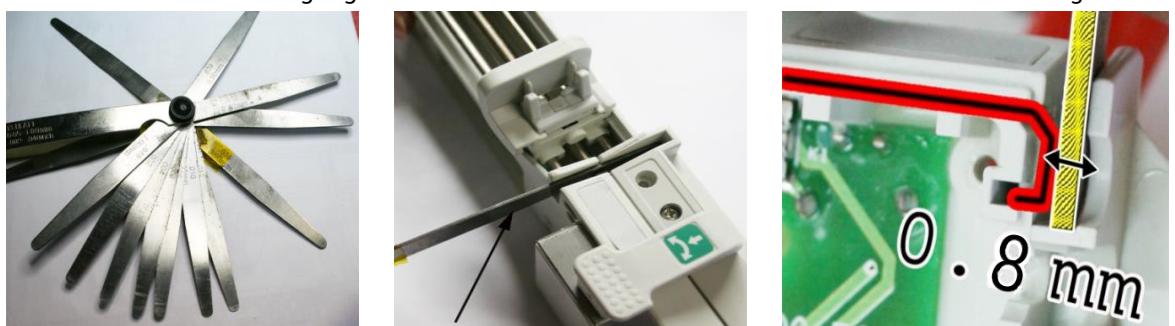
Metric Feeler Gauge (Right) – Measuring 0.8 mm (Left and Bottom)
